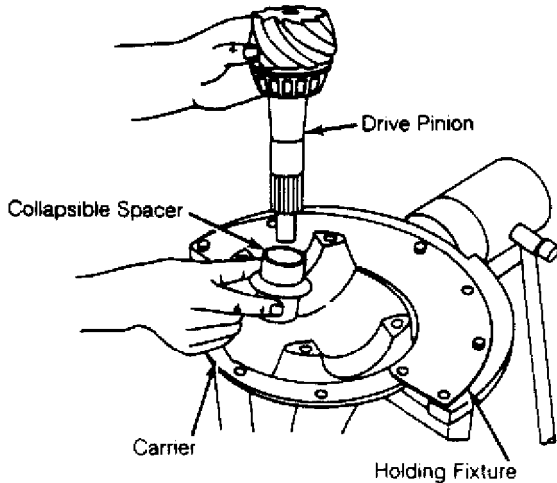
Installing Drive Pinion Bearing Collapsible Spacer
